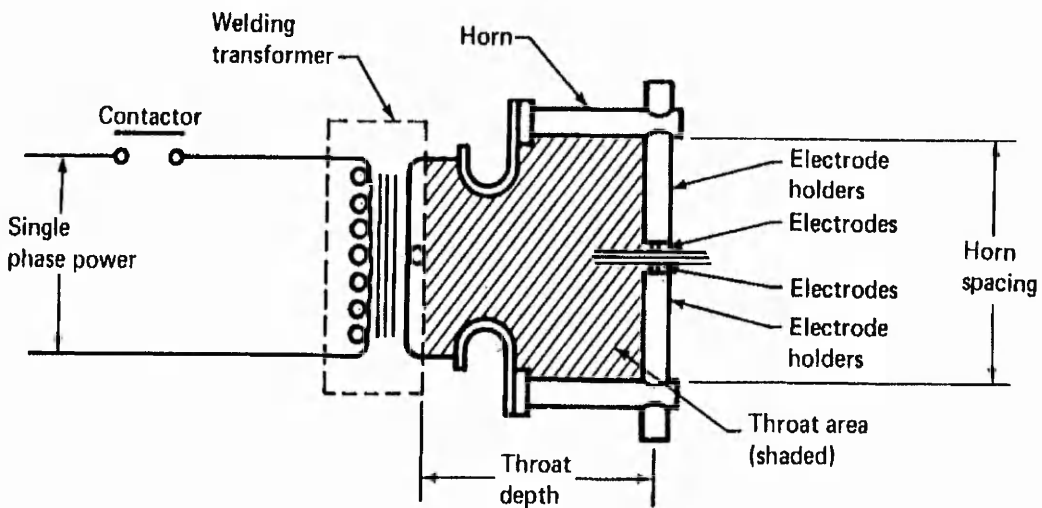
Schematic diagram of a spot welding machine (AWS 1980)
